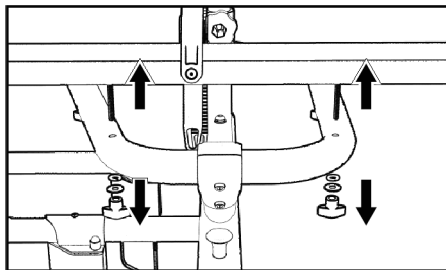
Unscrew the wing nuts and remove the standard wheel rail
